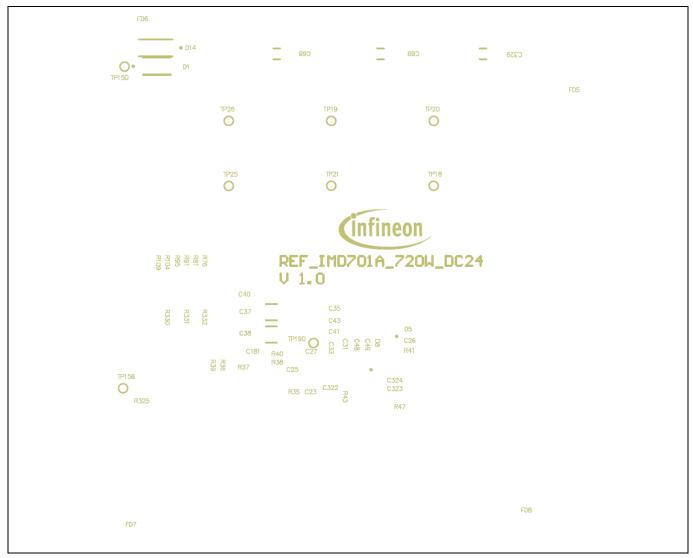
REF_IMD701A_720W_DC24 PCB bottom silkscreen
